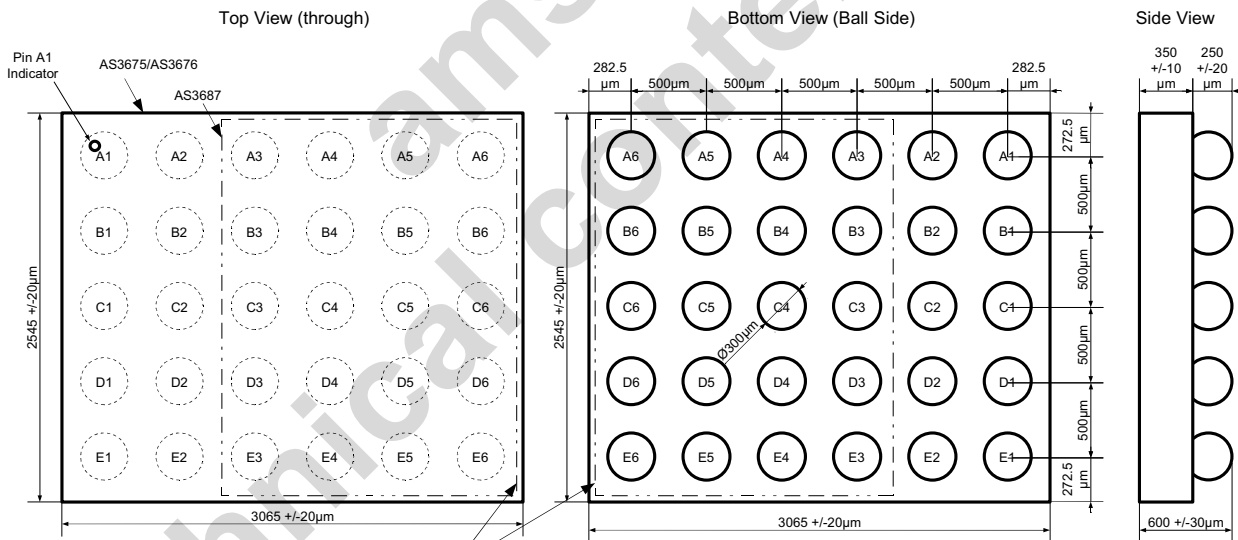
WL-CSP30 3x2.5mm 6x5 Balls Package Drawing
